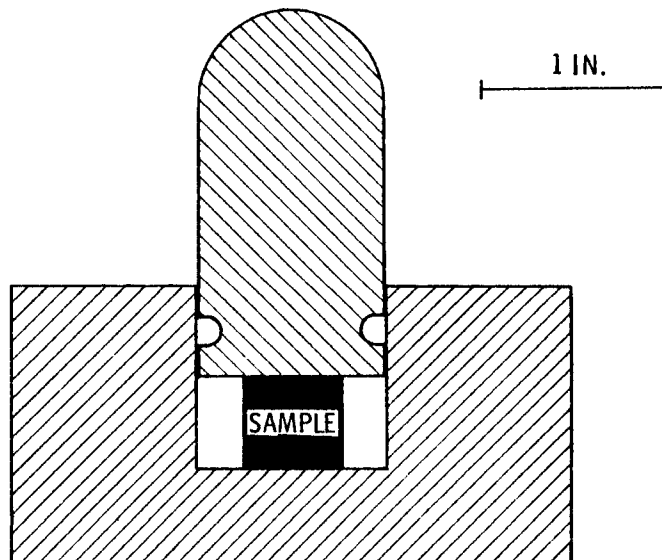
Sectional view of the punch and die arrangement. The insets shown in the punch are swirl chambers.
